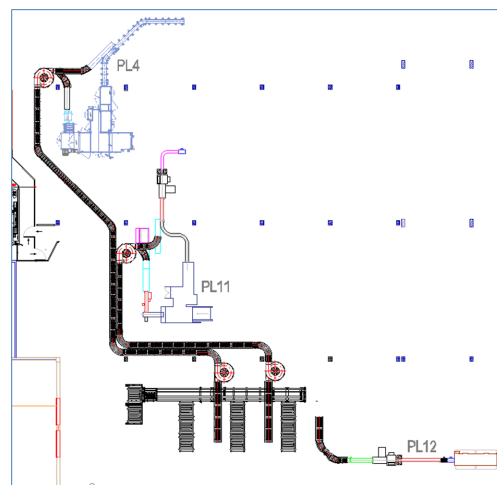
Conveyor system installed downstream of cartoning machines with dual pallet destackers
